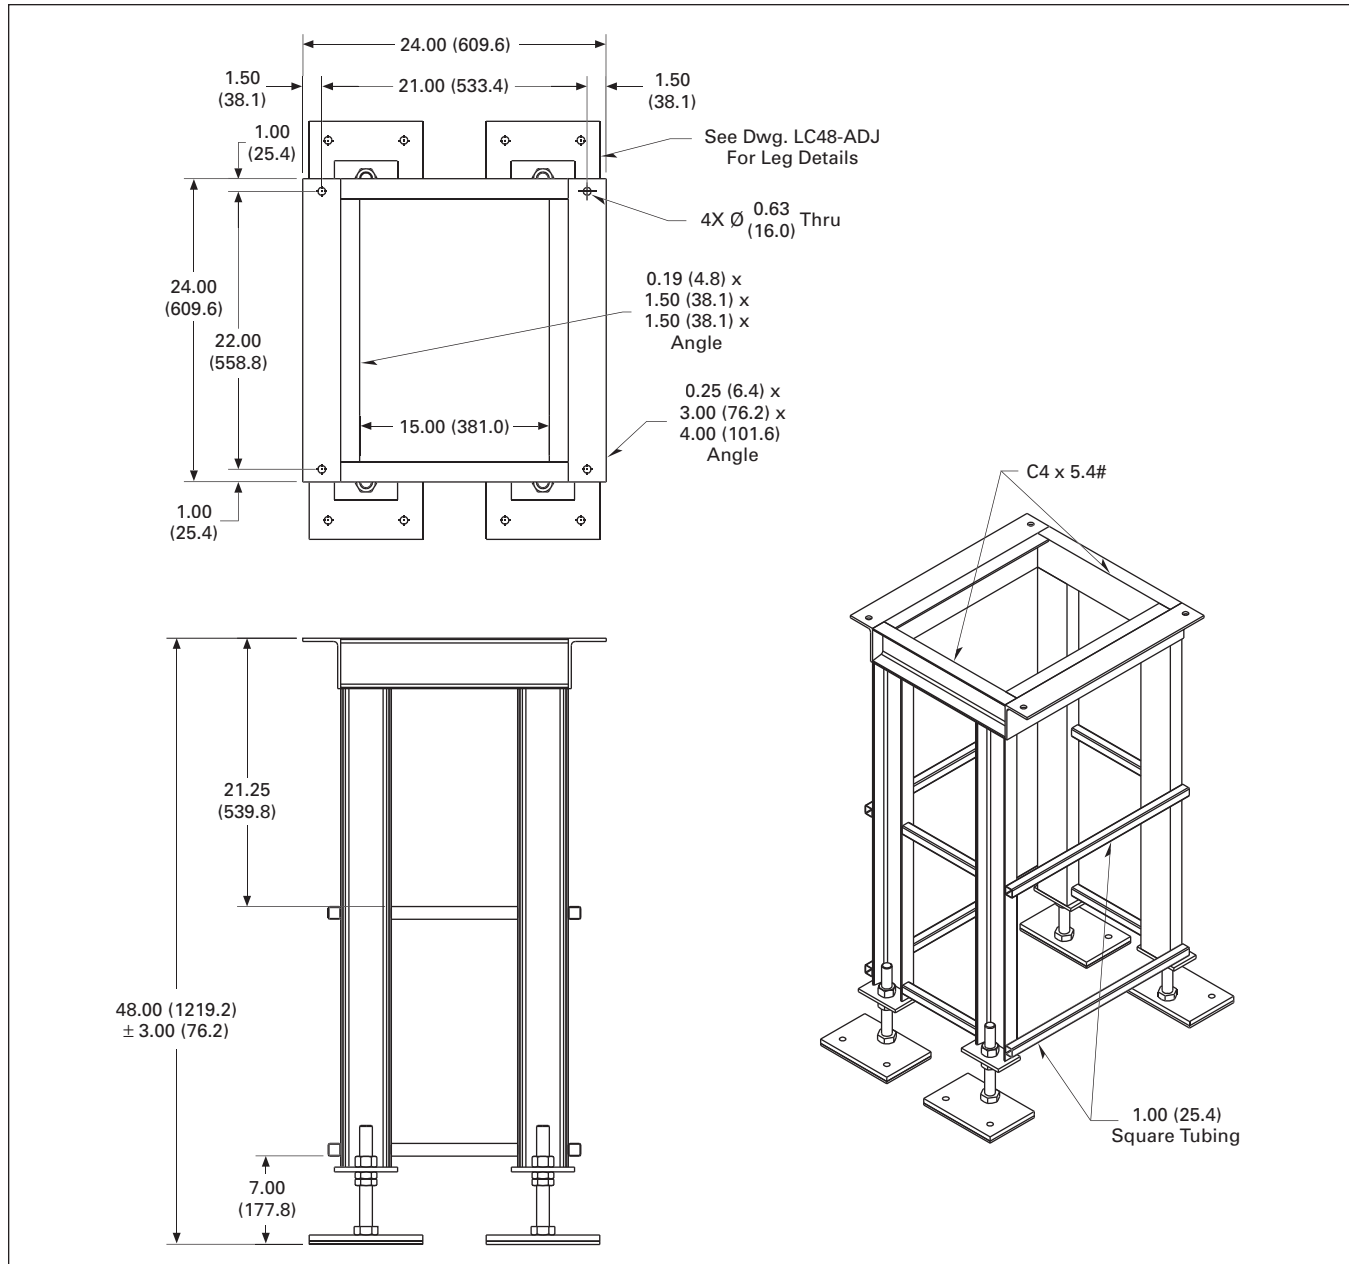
RPP Floorstand, 48.00 Inch (1219.2)—Dimensions in Inches (mm)
